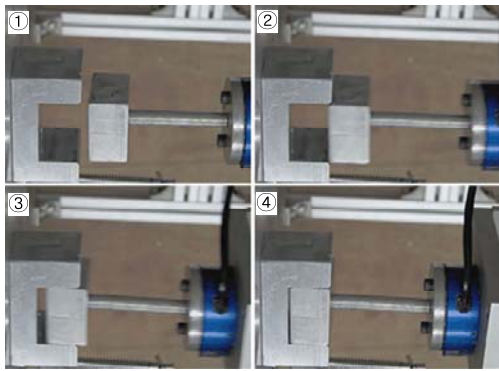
Sequences of robotic assembly using HVSA-actuated manipulator.
